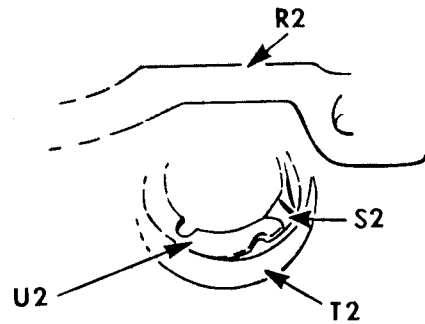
Showing Correct Position of Thread Guard T2 and Bobbin Case Holder U2 for Removal of Sewing Hook
